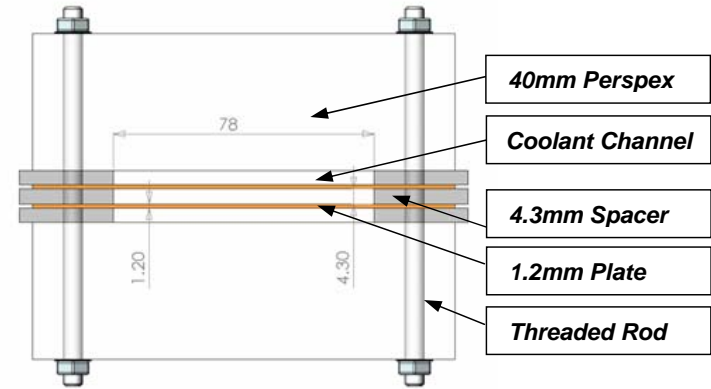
Top view of the flat plate fuel-assembly-model, dimensions are in millimetres.
